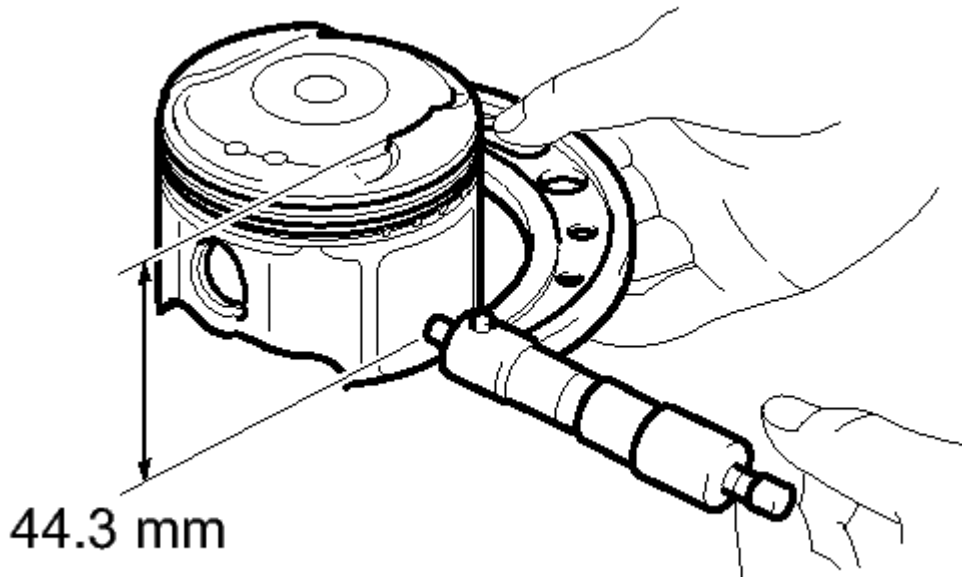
Measuring Piston Diameter At Right Angles To Piston Pin Hole, And At Piston 44.3 mm (1.7441 in.) From Piston Head
